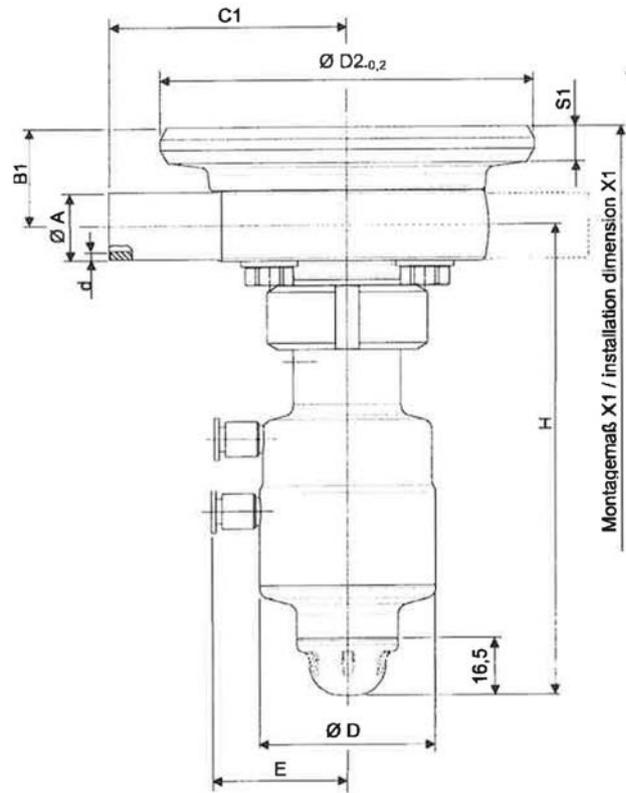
VESTA tank bottom valve H_A/T/F and H_A/T/F/M with housing for flanging
